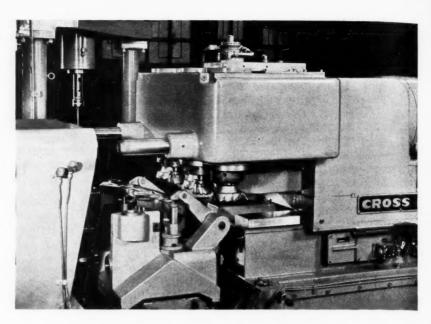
Multiple-spindle milling head with "Cross-Drive" pre-set cutters arranged for milling five manifold pads
